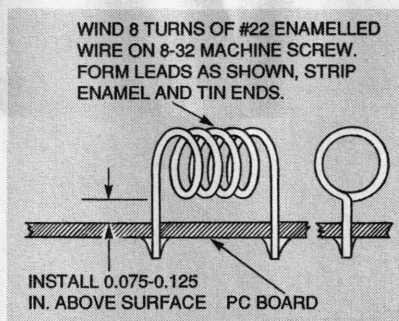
COIL L2 FORMING and installation details. Wind 8 turns on 8-32 machine screw to form coil L2. Do not remove screw until after installation on PC board.
